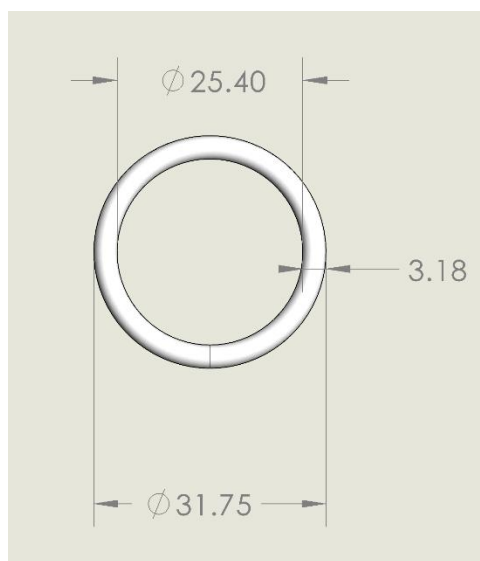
Diagram showing the dimensions in mm of the O-ring-214 specimens used.
